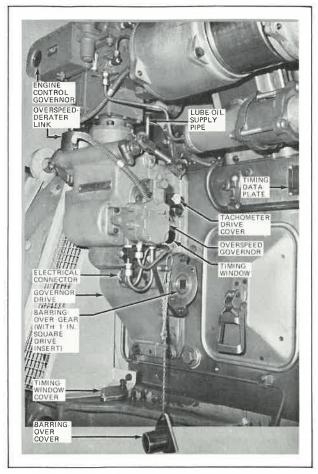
GOVERNOR DRIVE MOUNTED ON ENGINE.
